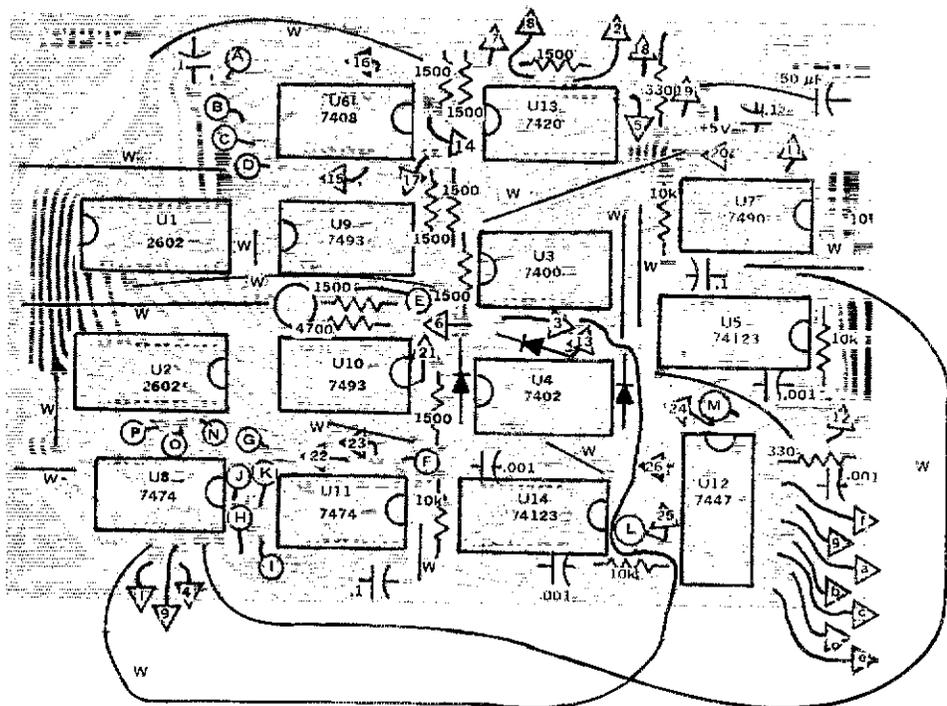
Etching pattern and component layout for memory board of the Accu-Memory as seen from component side of board. Ready-made circuit boards are available (see reference 4). Letters and numbers in circles indicate points for connection to other parts of the device, as listed in Table I. W = wire jumpers.
